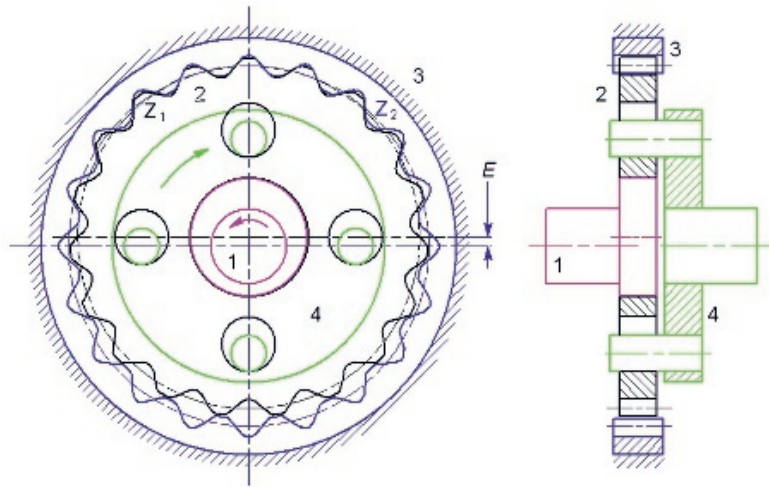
Planocentric gear arrangement; 1 – input shaft with the eccentric, 2 – planet gear, 3 – ring gear, 4 – carrier connected to output shaft, E – eccentricity, gear center distance.
